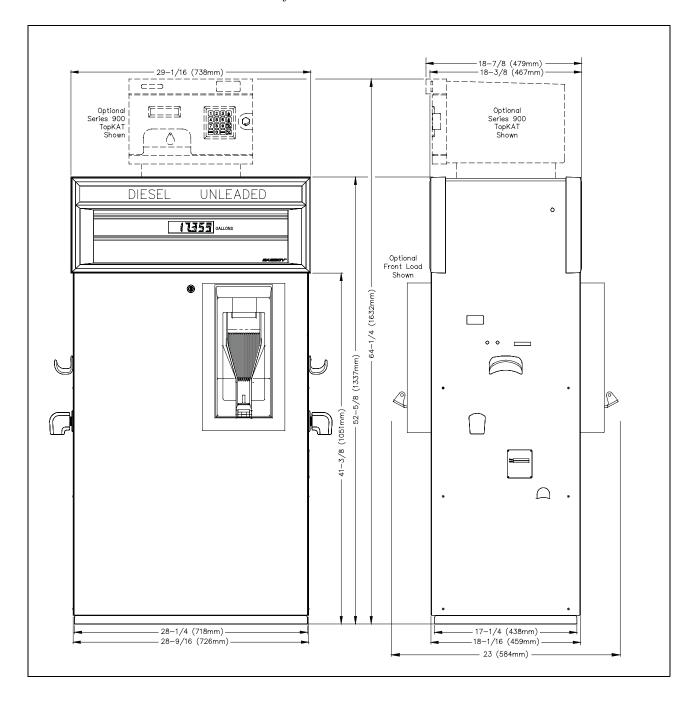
Series 9800A Single Pump/Remote Dispenser Front Load Nozzle Dimensions
